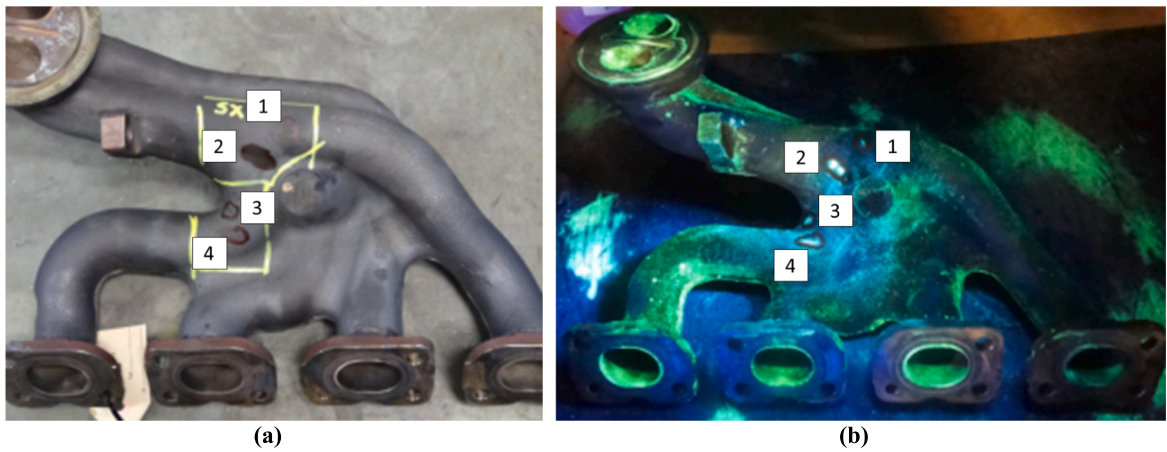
Engine C1 – 1, 2, 3, 4 indicate failures identified by dye penetrant tests on the left-hand side exhaust manifold.
